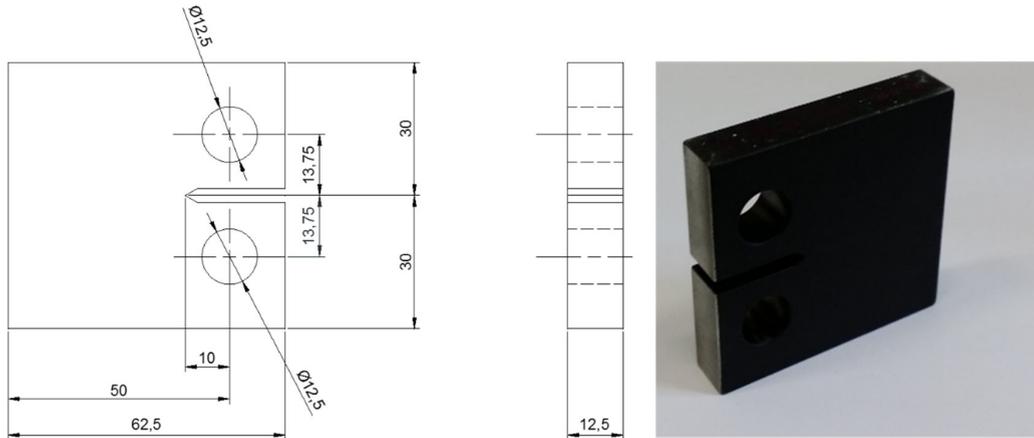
Specimen dimension in mm according to ASTM E 647-00.
